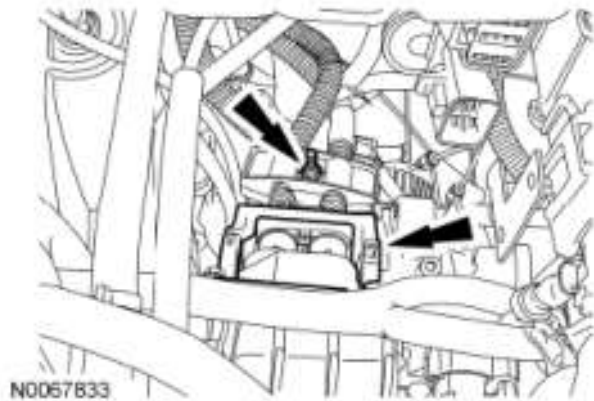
Locating Stud Bolt And Transaxle Harness Electrical Connector
